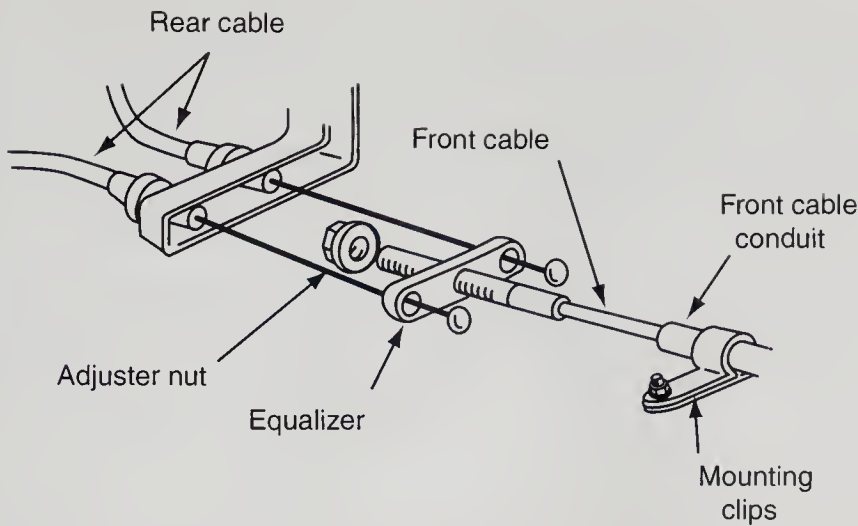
Typical parking brake cable installation showing an adjusting mechanism.
